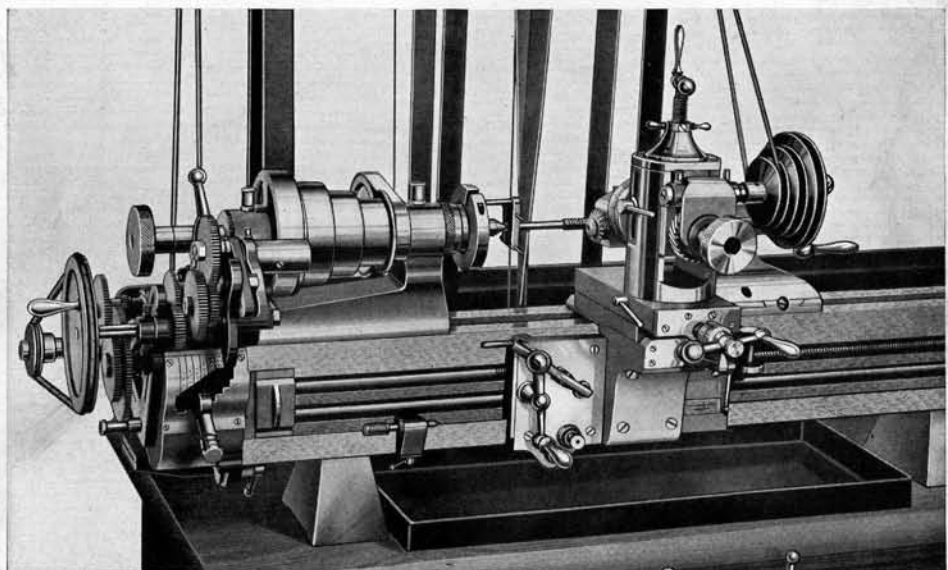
Rivett 608 (4 N.S.) lathe with quick change gear box on cabinet with Thread Milling Attachment on Traverse Miller milling a screw thread
